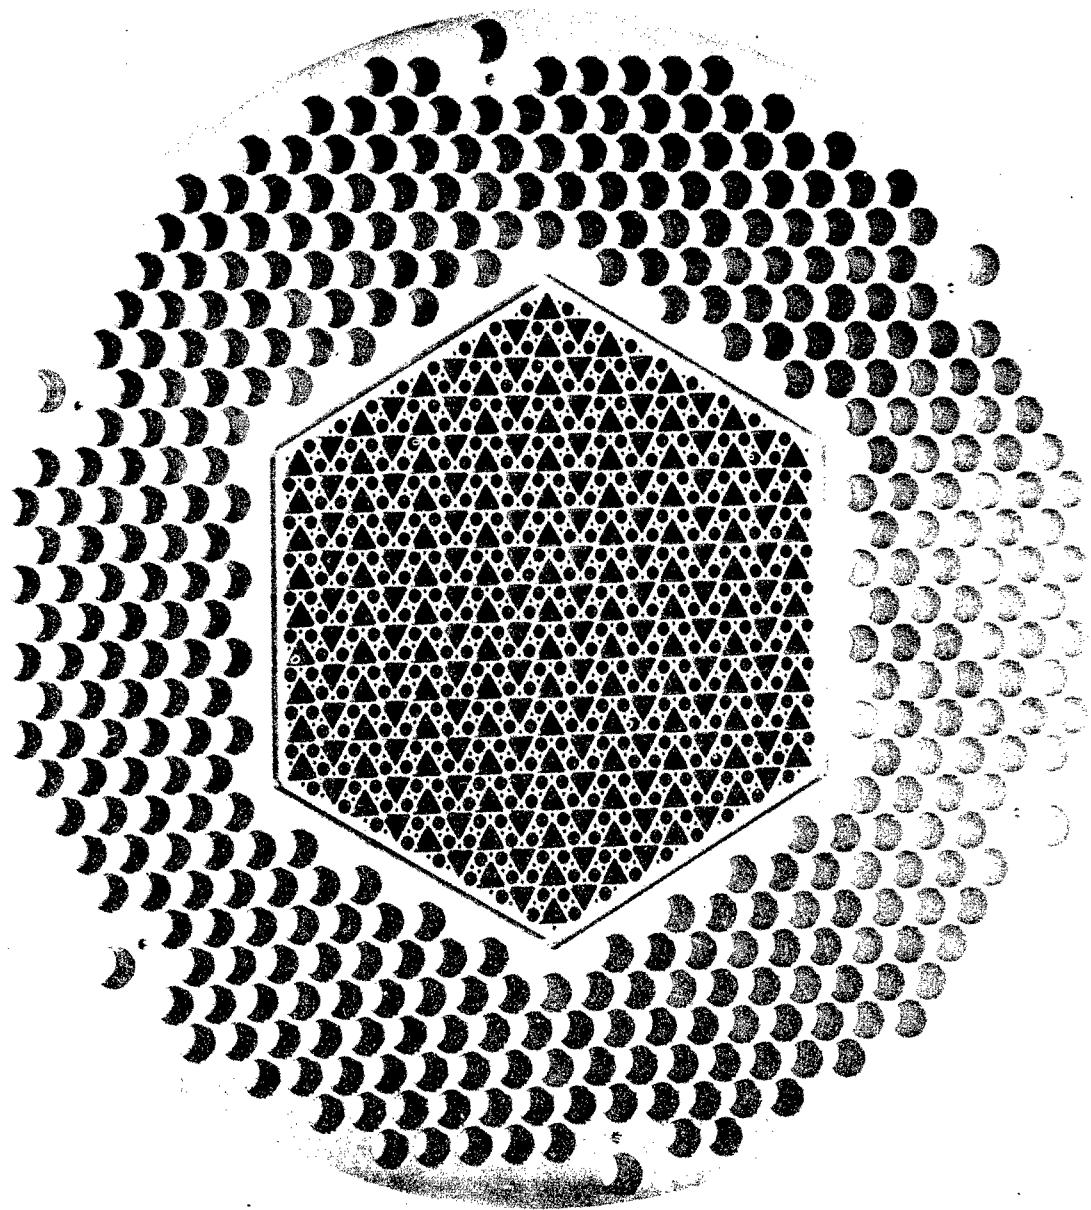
Bottom Plate Showing Coolant Flow Holes and Rod Engaging Holes
